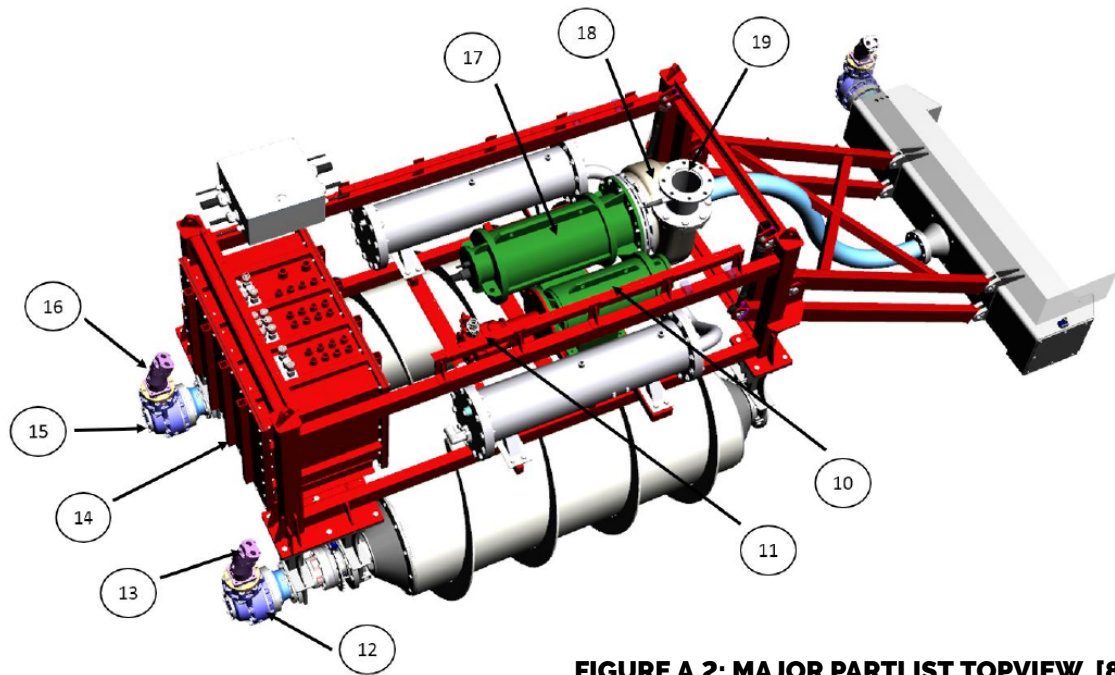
MAJOR PARTLIST TOPVIEW [8]
